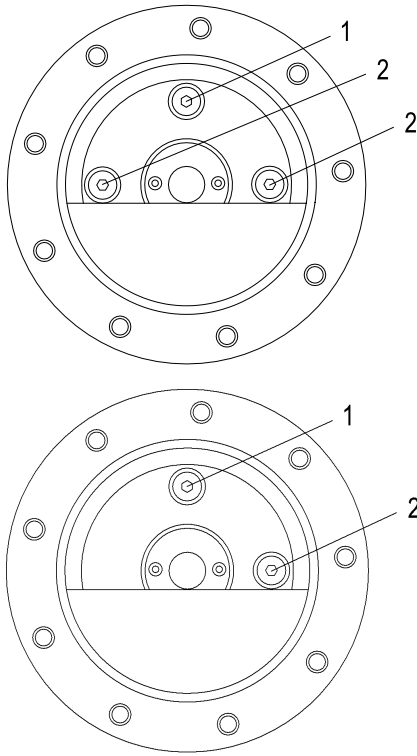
Diagram – Drive Reducer Gear Oil Check
